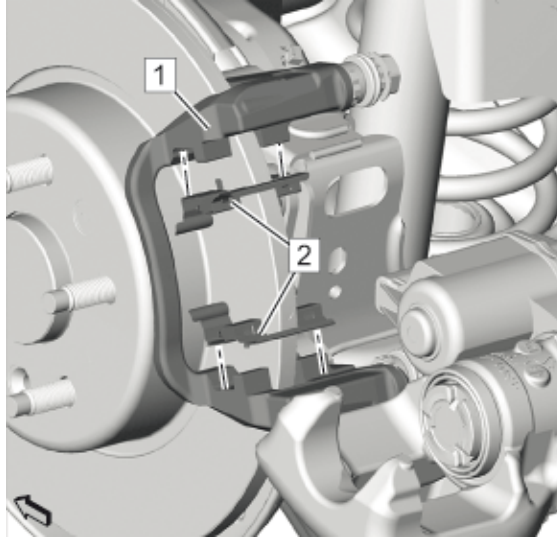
Rear Brake Caliper Bracket And Brake Pad Springs
